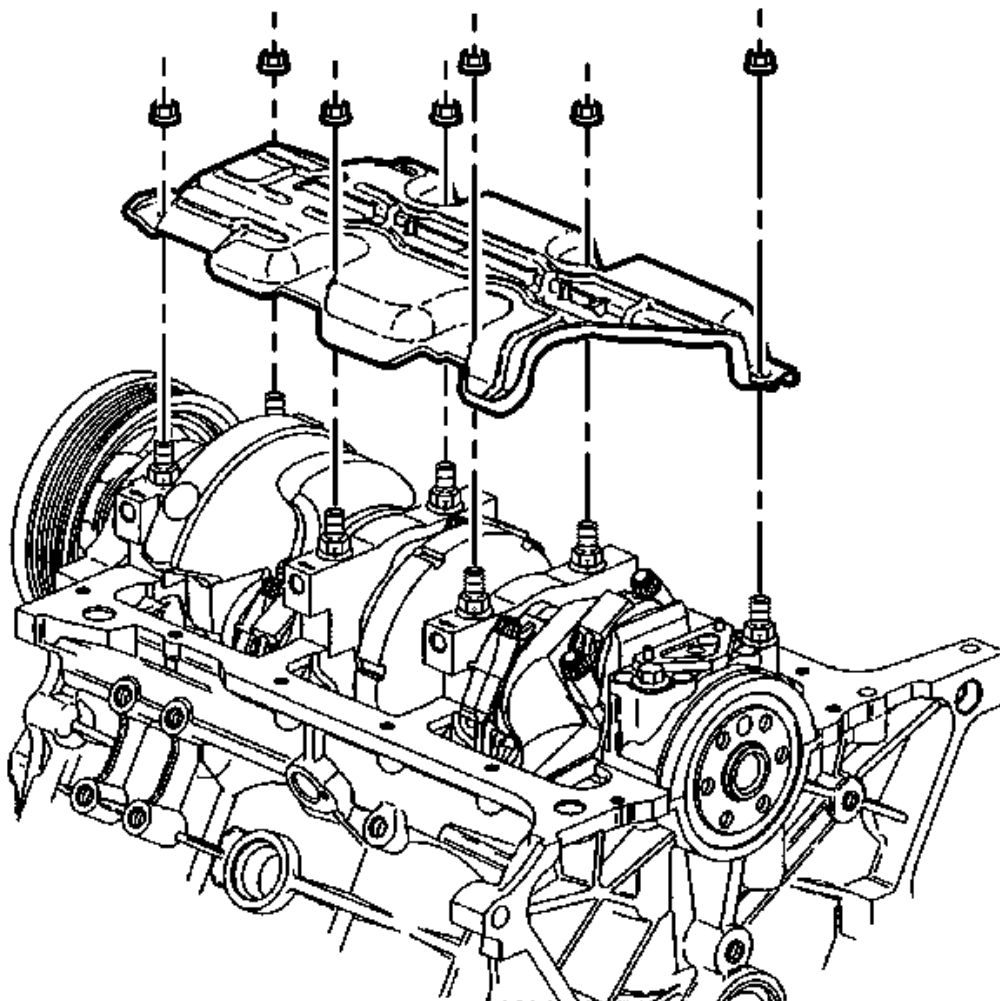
View Of Crankshaft Oil Deflector & Nuts
